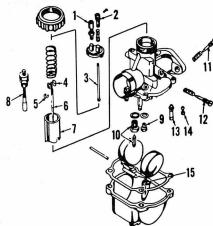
Exploded view of typical VM type carburetor. Model VM20 SC uses a choke instead of starter valve shown.
